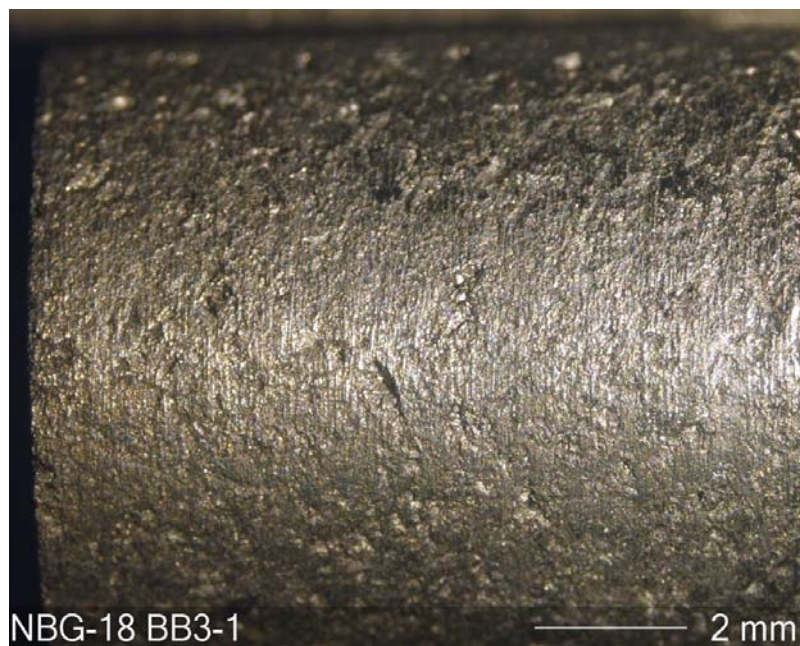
NBG-18 specimen BB3-1 macrograph showing surface roughness and machining marks
